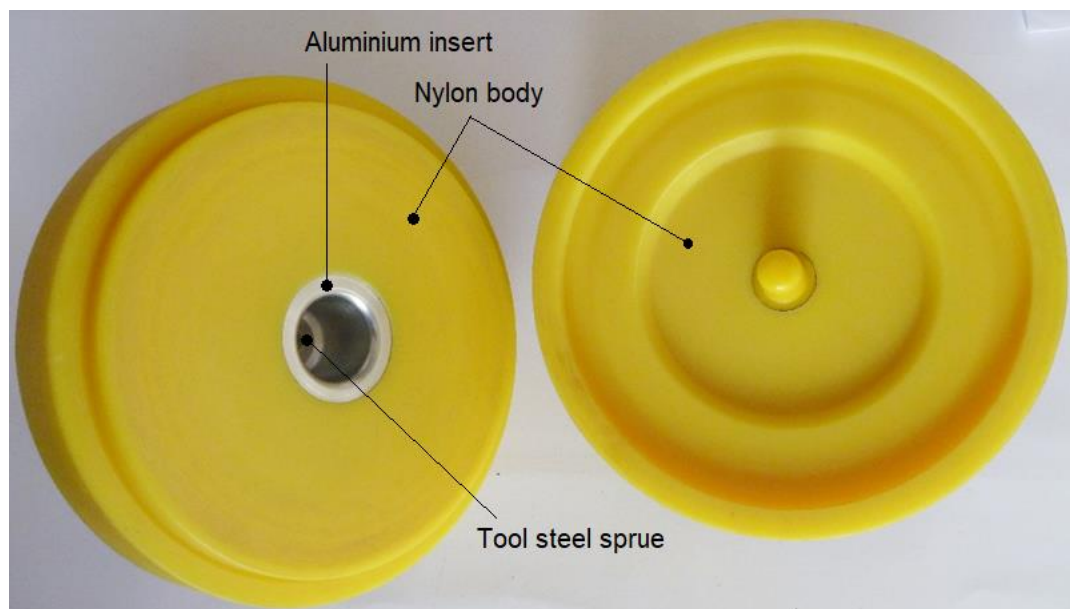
Composite tool insert produced using polyamide (nylon), aluminium and tool steel, suitable for production run < 100 parts
